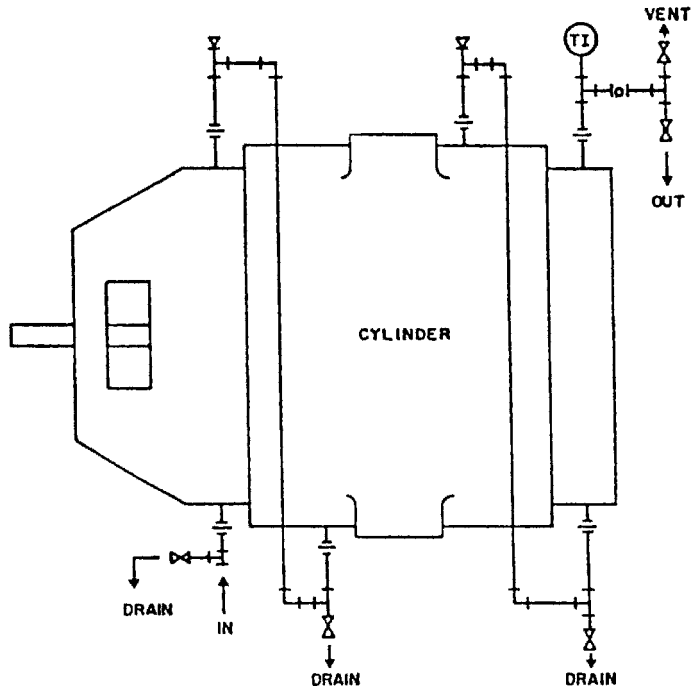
Forced cooling arrangement for large compressor cylinders. (Dresser-Rand Company, Painted Post, N.Y.)
